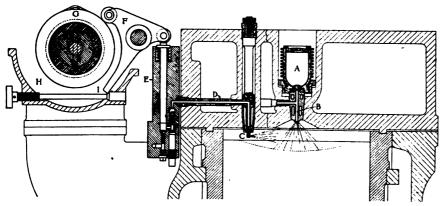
Diagram of operation of one type of Diesel engine. This is the Steinbeker fuel injection method and has been used in one motor vehicle sized engine.
